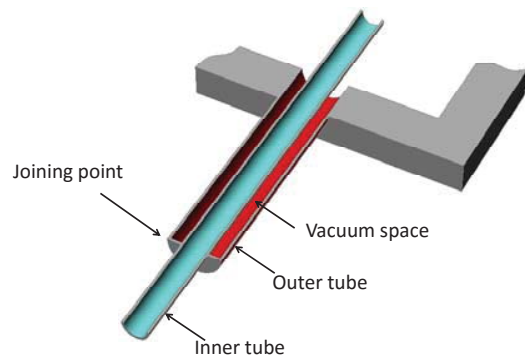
Schematic diagram of co-centric tube inlet and outlet port design
